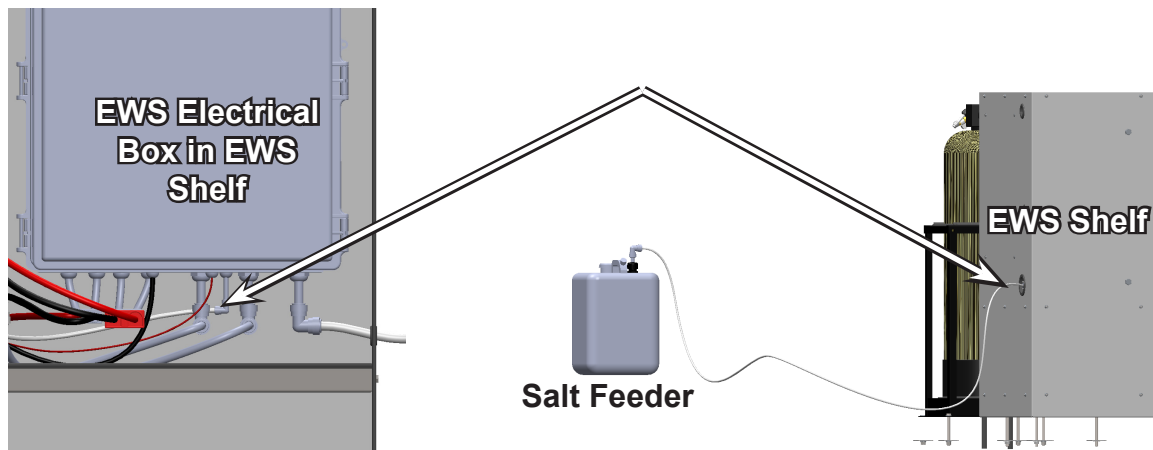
Route Tube from Salt Feeder to Connector on Bottom of EWS Electrical Box
